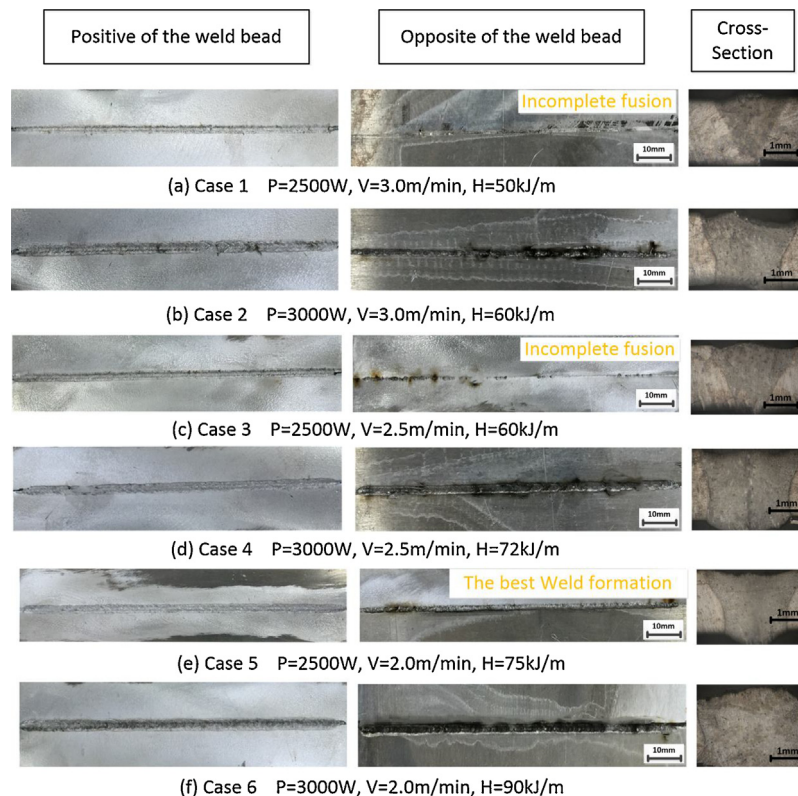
Surface morphologies and cross sections of the disk laser beam welds under different welding parameters.
